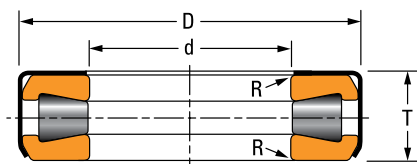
Type TTC thrust tapered roller bearing assembly.
